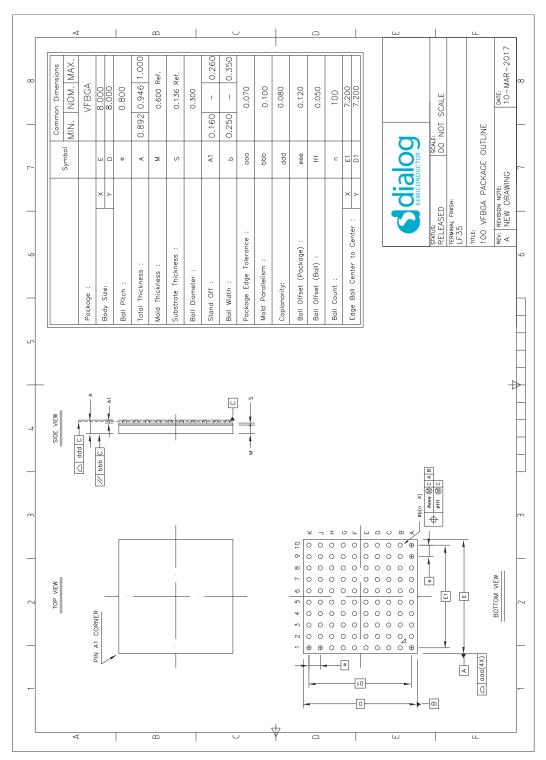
Package Outline Drawing 100 VFBGA 0.3 mm Ball Diameter
